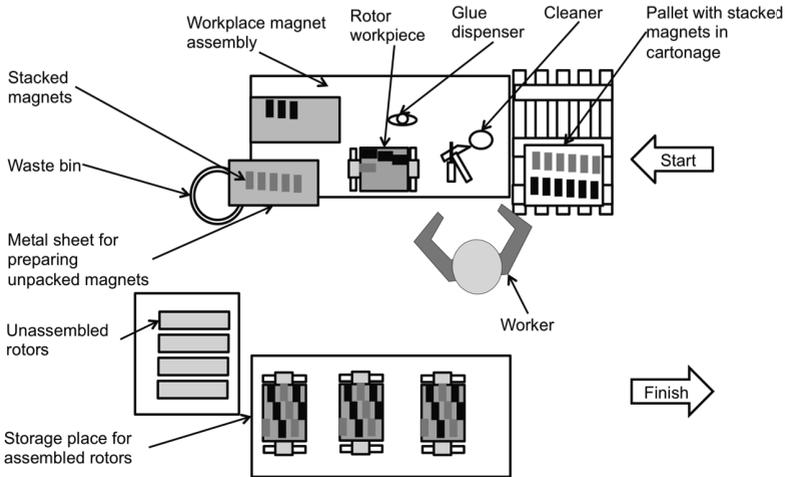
Workplace layout for small lot size permanent magnet assembly
